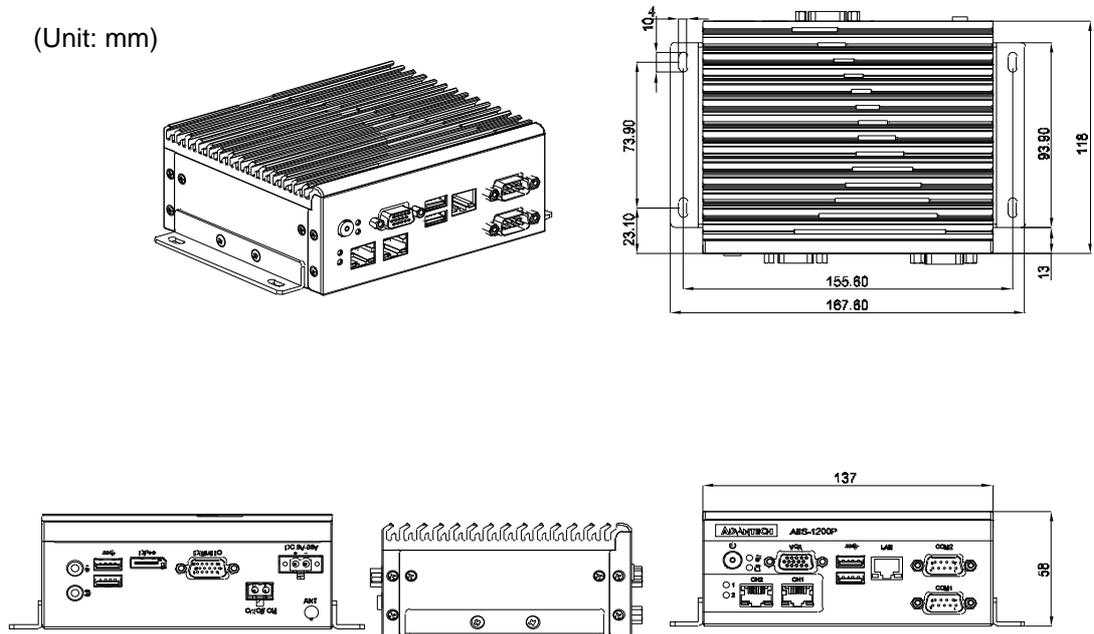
AIIS-1200P Mechanical Dimension Drawing
